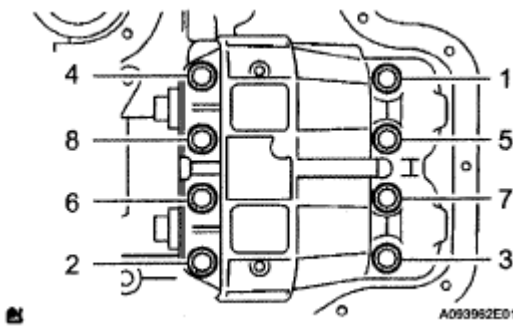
Identifying Balance Shaft Housing Bolts Sequence
